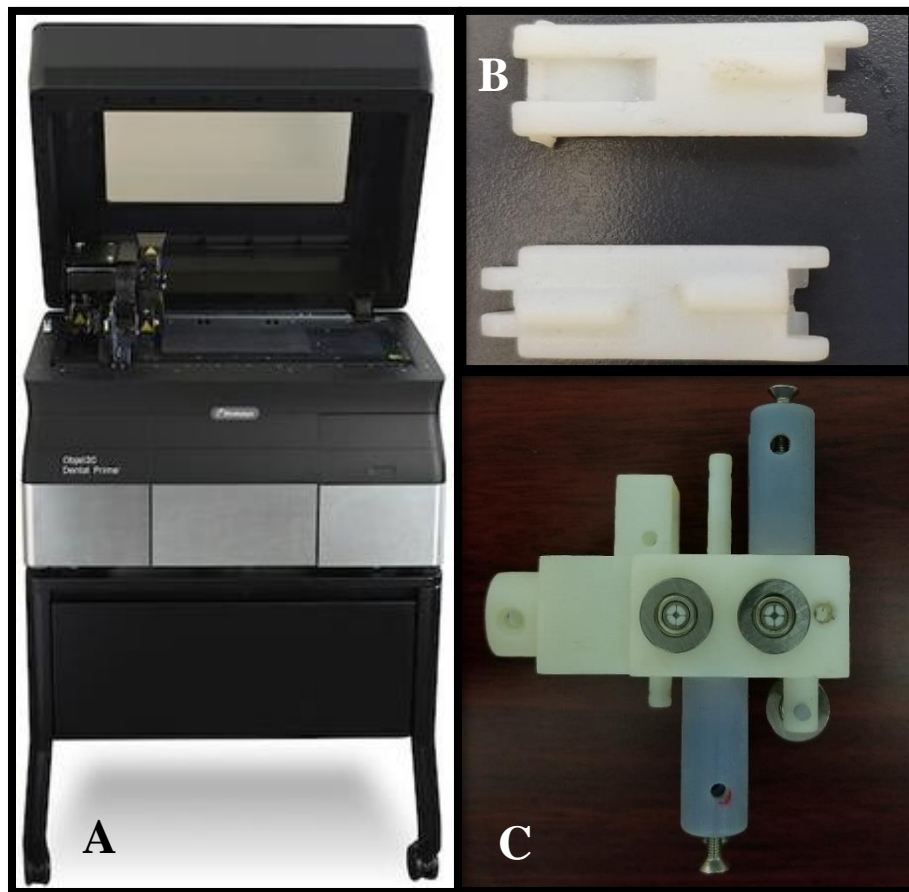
Stratasy's Objet30 Prime 3D printer and sample printed parts using two different materials
